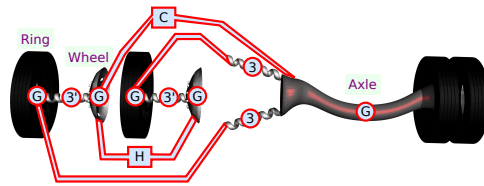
Exploded view of the L4 link between the dual wheels and their axle.
